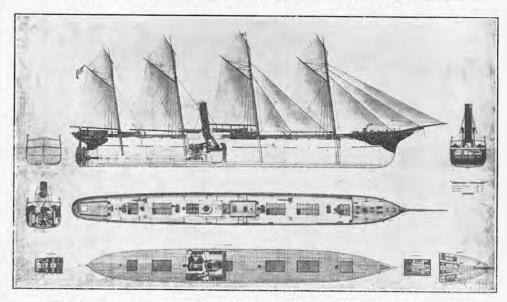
RIGGING PLAN OF BIBBY STEAMERS BUILT AT QUEEN'S ISLAND, 1861.
